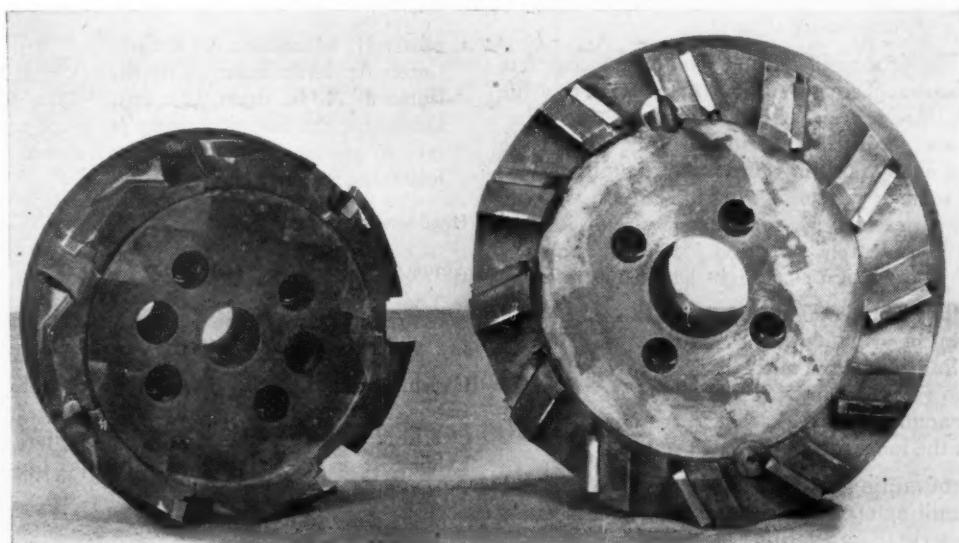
MULTIPLE-TOOTH FACE MILLS USED IN POWER TESTS
